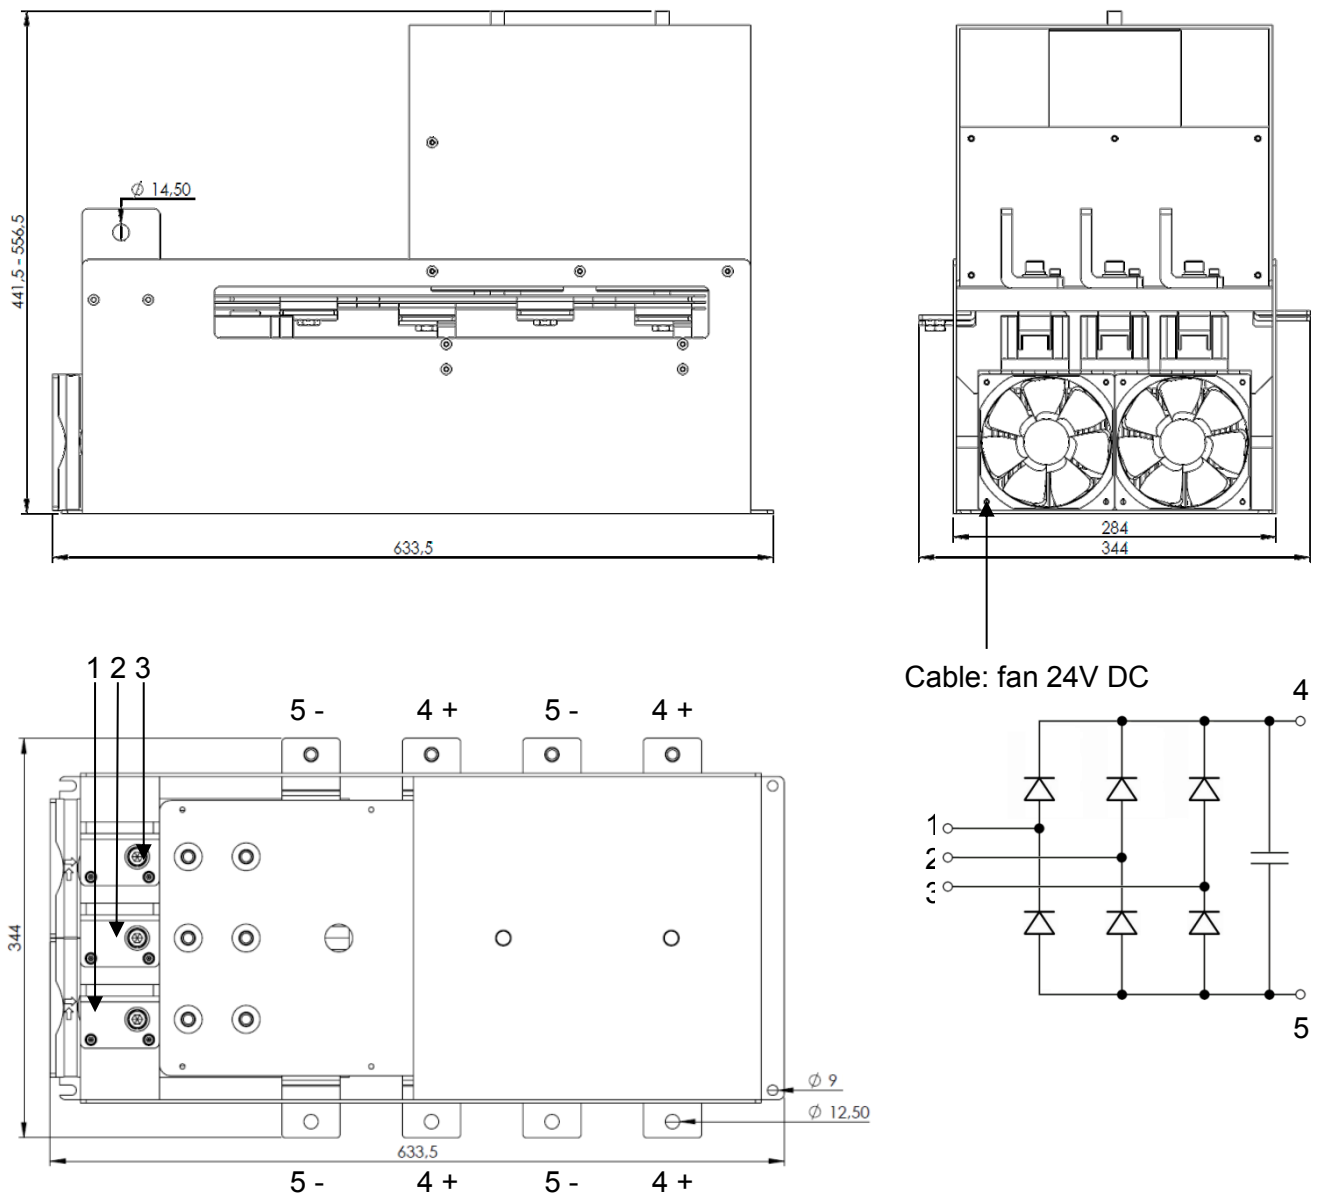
Mechanical drawing of the VARIS™ R-580-U-A (air cooled)
